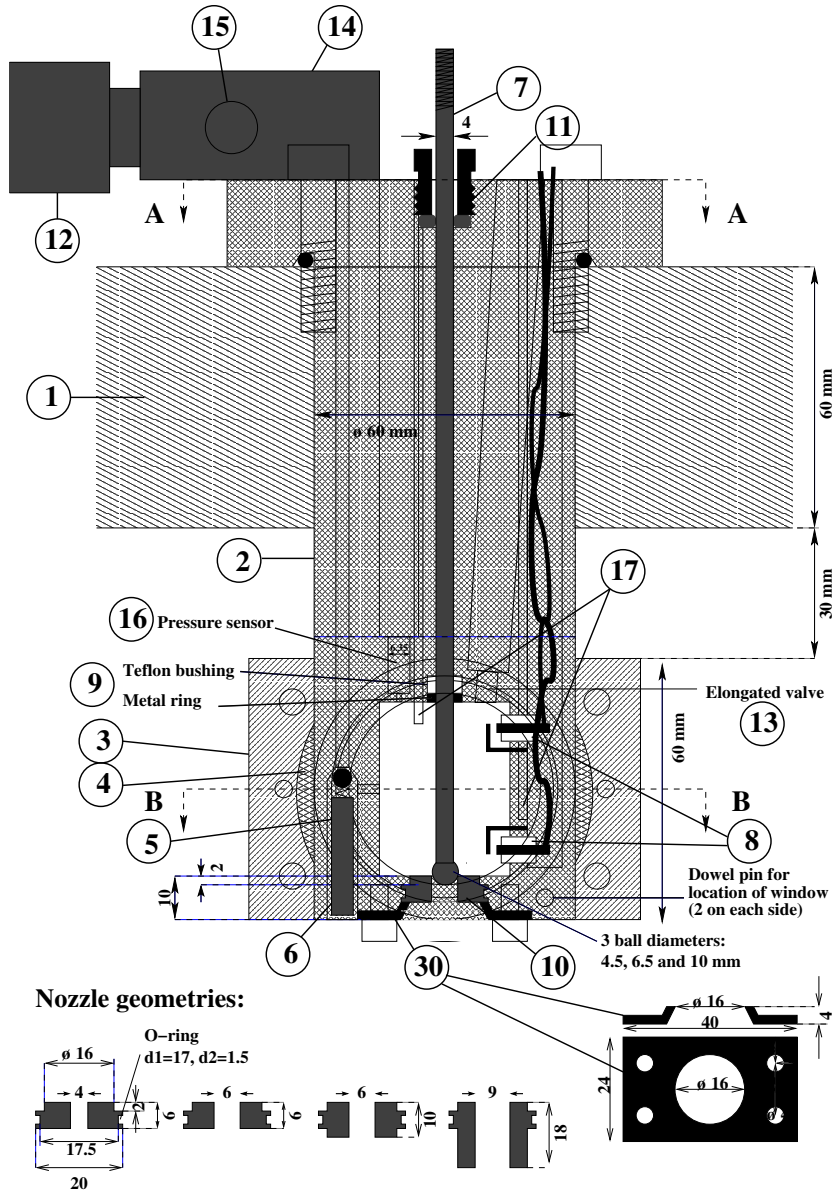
Cutaway drawing of prechamber assembly consisting of the following main parts: (1) Main chamber housing, (2) Prechamber housing, (3) Window and holder (two off, one on each side), (5) One way valve for gas supply, (7) Pin for closing then nozzle, (8) Spark plugs, (10) Nozzle, (12) Valve for gas supply, solenoid operated, (13) Exhaust valve, solenoid operated, (14) Gas supply manifold, (16) Pressure sensor, (17) Temperature sensors, (30) Nozzle holder.
